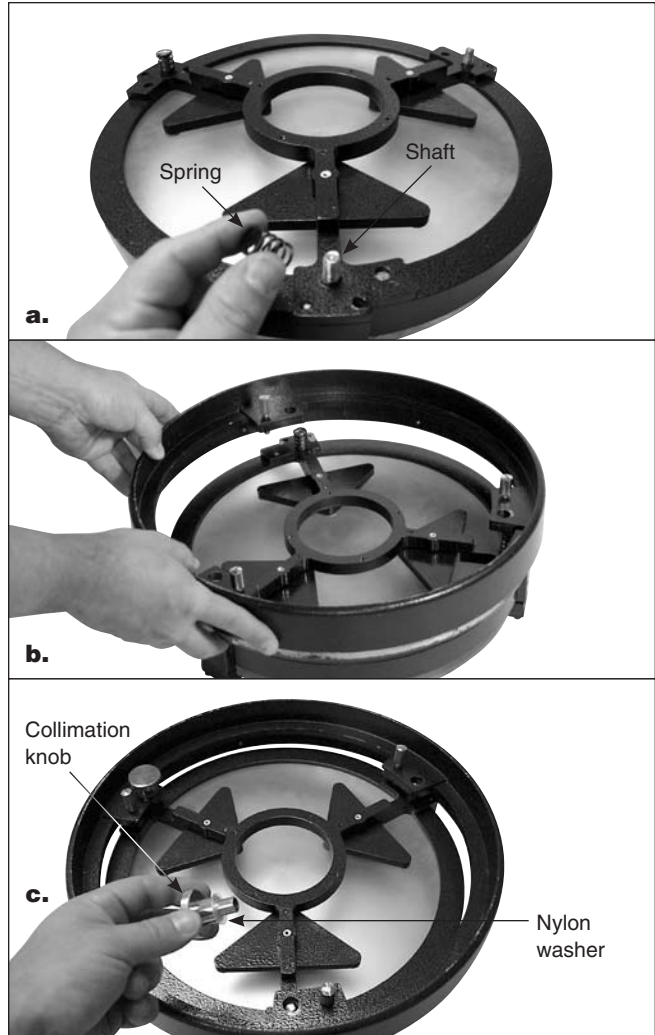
a) Place the three springs on the exposed threaded shafts of the mirror cell. b) Lower the rear end ring onto the mirror cell so that the threaded shafts pass through the end ring, and the end ring rests on the springs. c) Thread the collimation knobs, with nylon washers attached, through the rear end ring and onto the threaded shafts.
